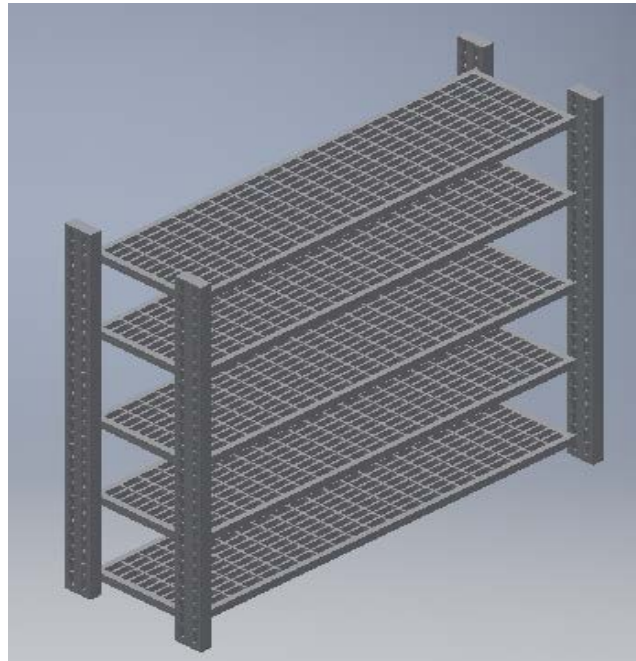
Metal rack draft. Inventor Autodesk assembly of the rack used in the mechanical system to place the light systems for testing.
